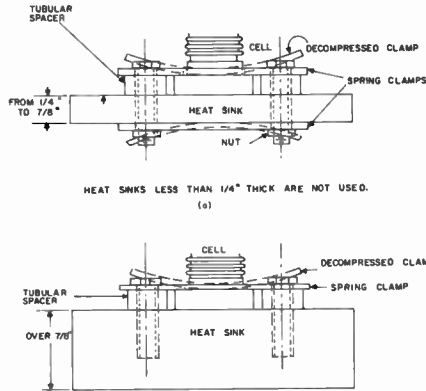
MOUNTING THE FLAT-BASE PACKAGE
